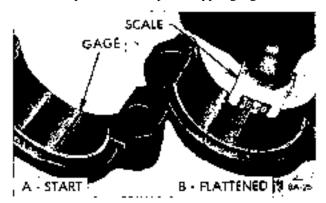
A-25 Checking Bearing Clearance With Plastic-Type Gauge
